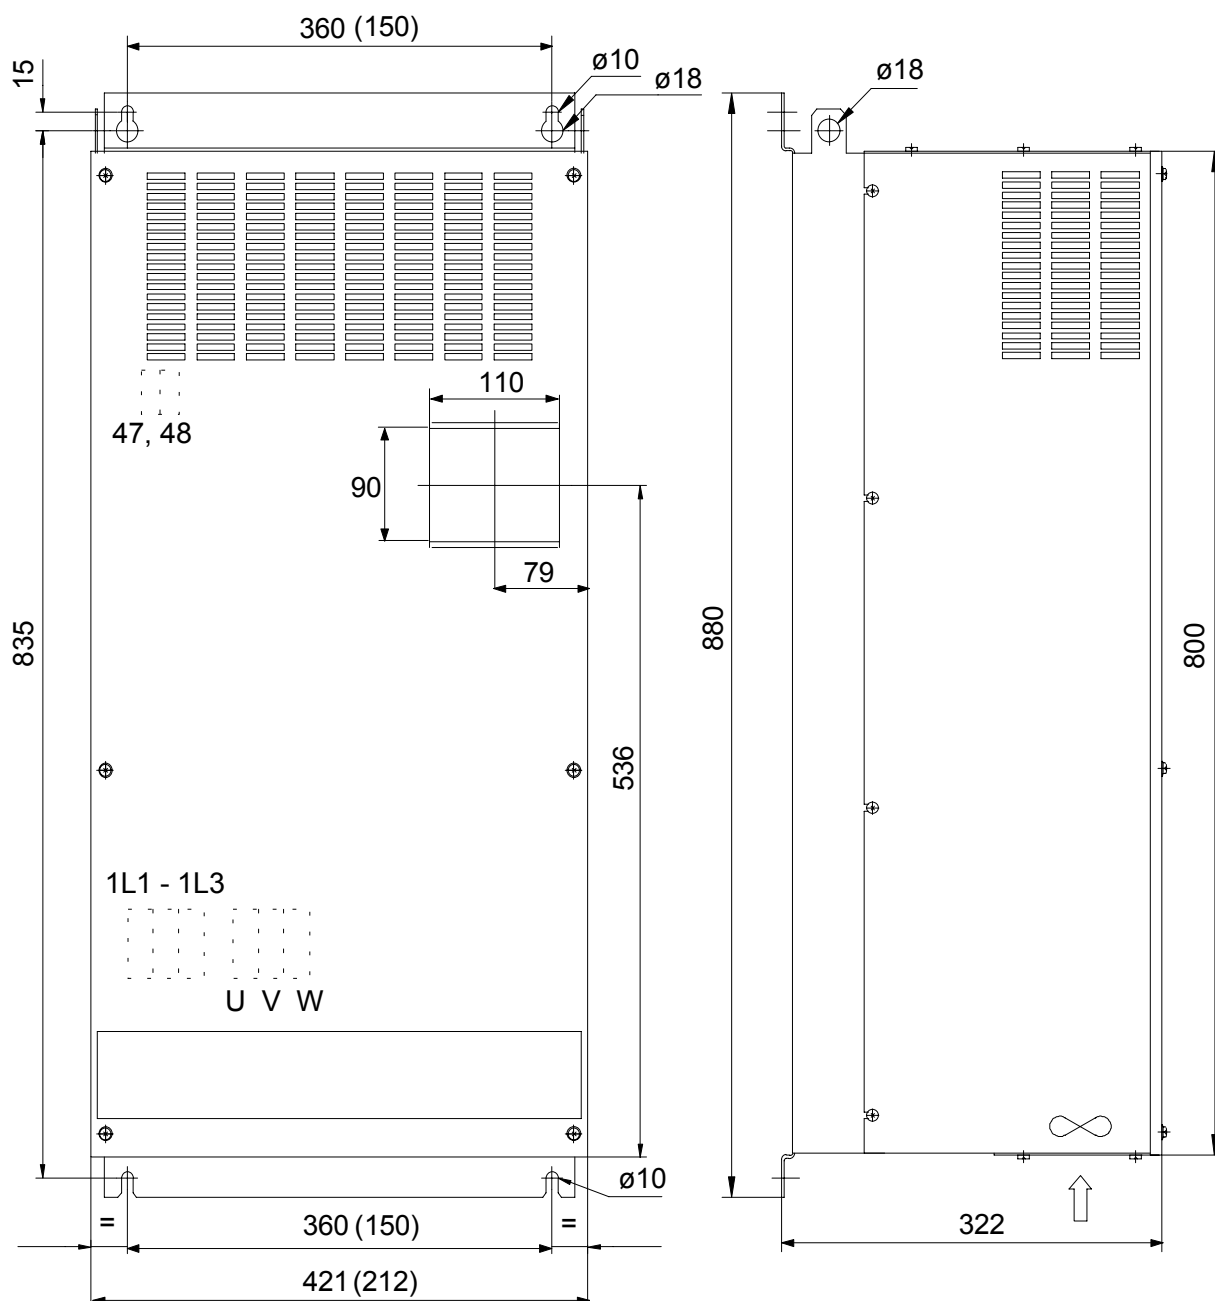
Dimensions (mm) of the GV3000/SE Type AC039/044
